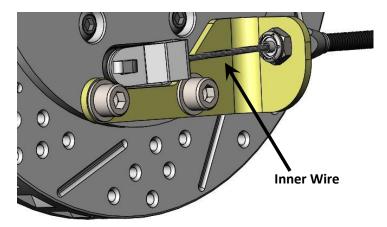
Inner Wire Installed (ALL Legend Series Rear Disc Brake Kits)
